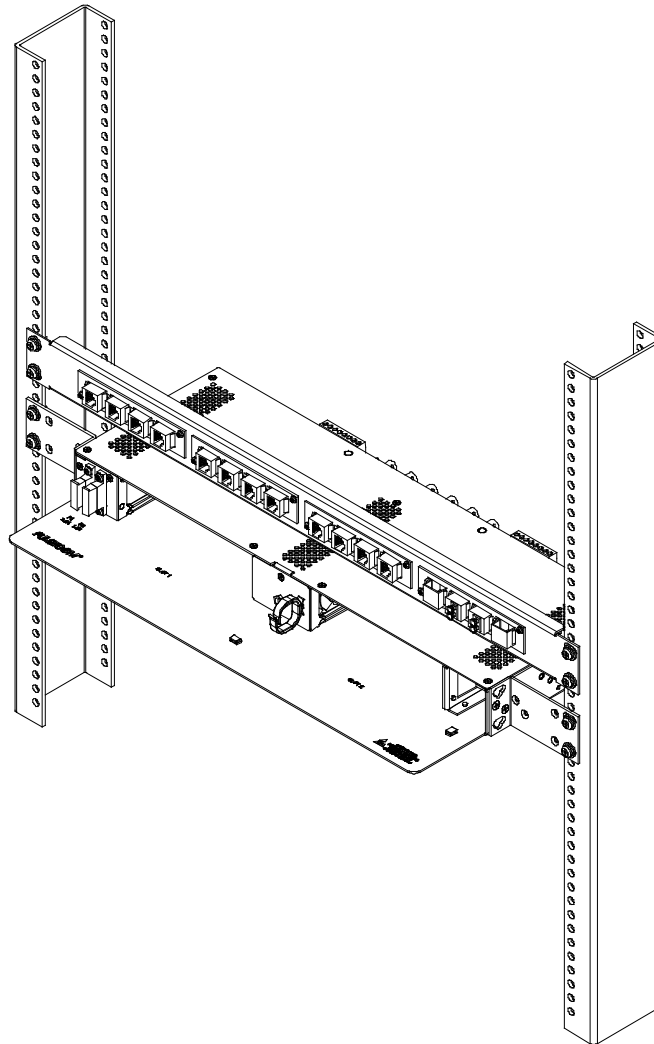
Rack-Mount View With Optional BP-23 Installed (Shown With Typical Demarc Jacks but Without Cables)
